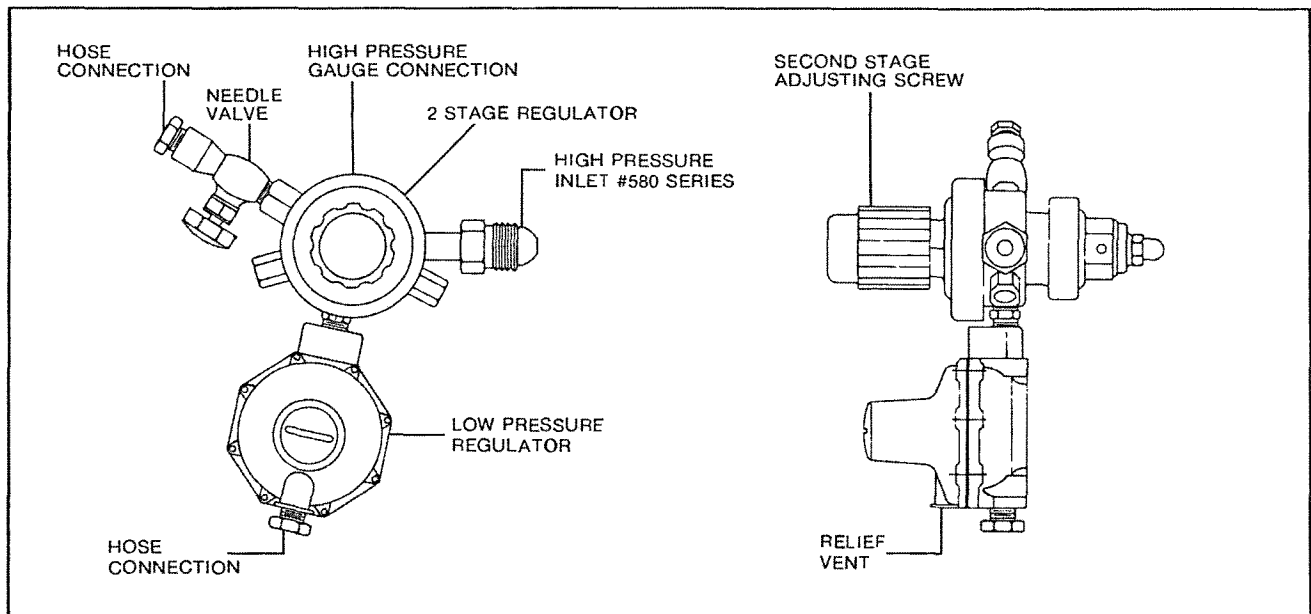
A. Regulator and Secondary Relief Valve Assembly (Type RN and RNE Inertaire Equipment)
